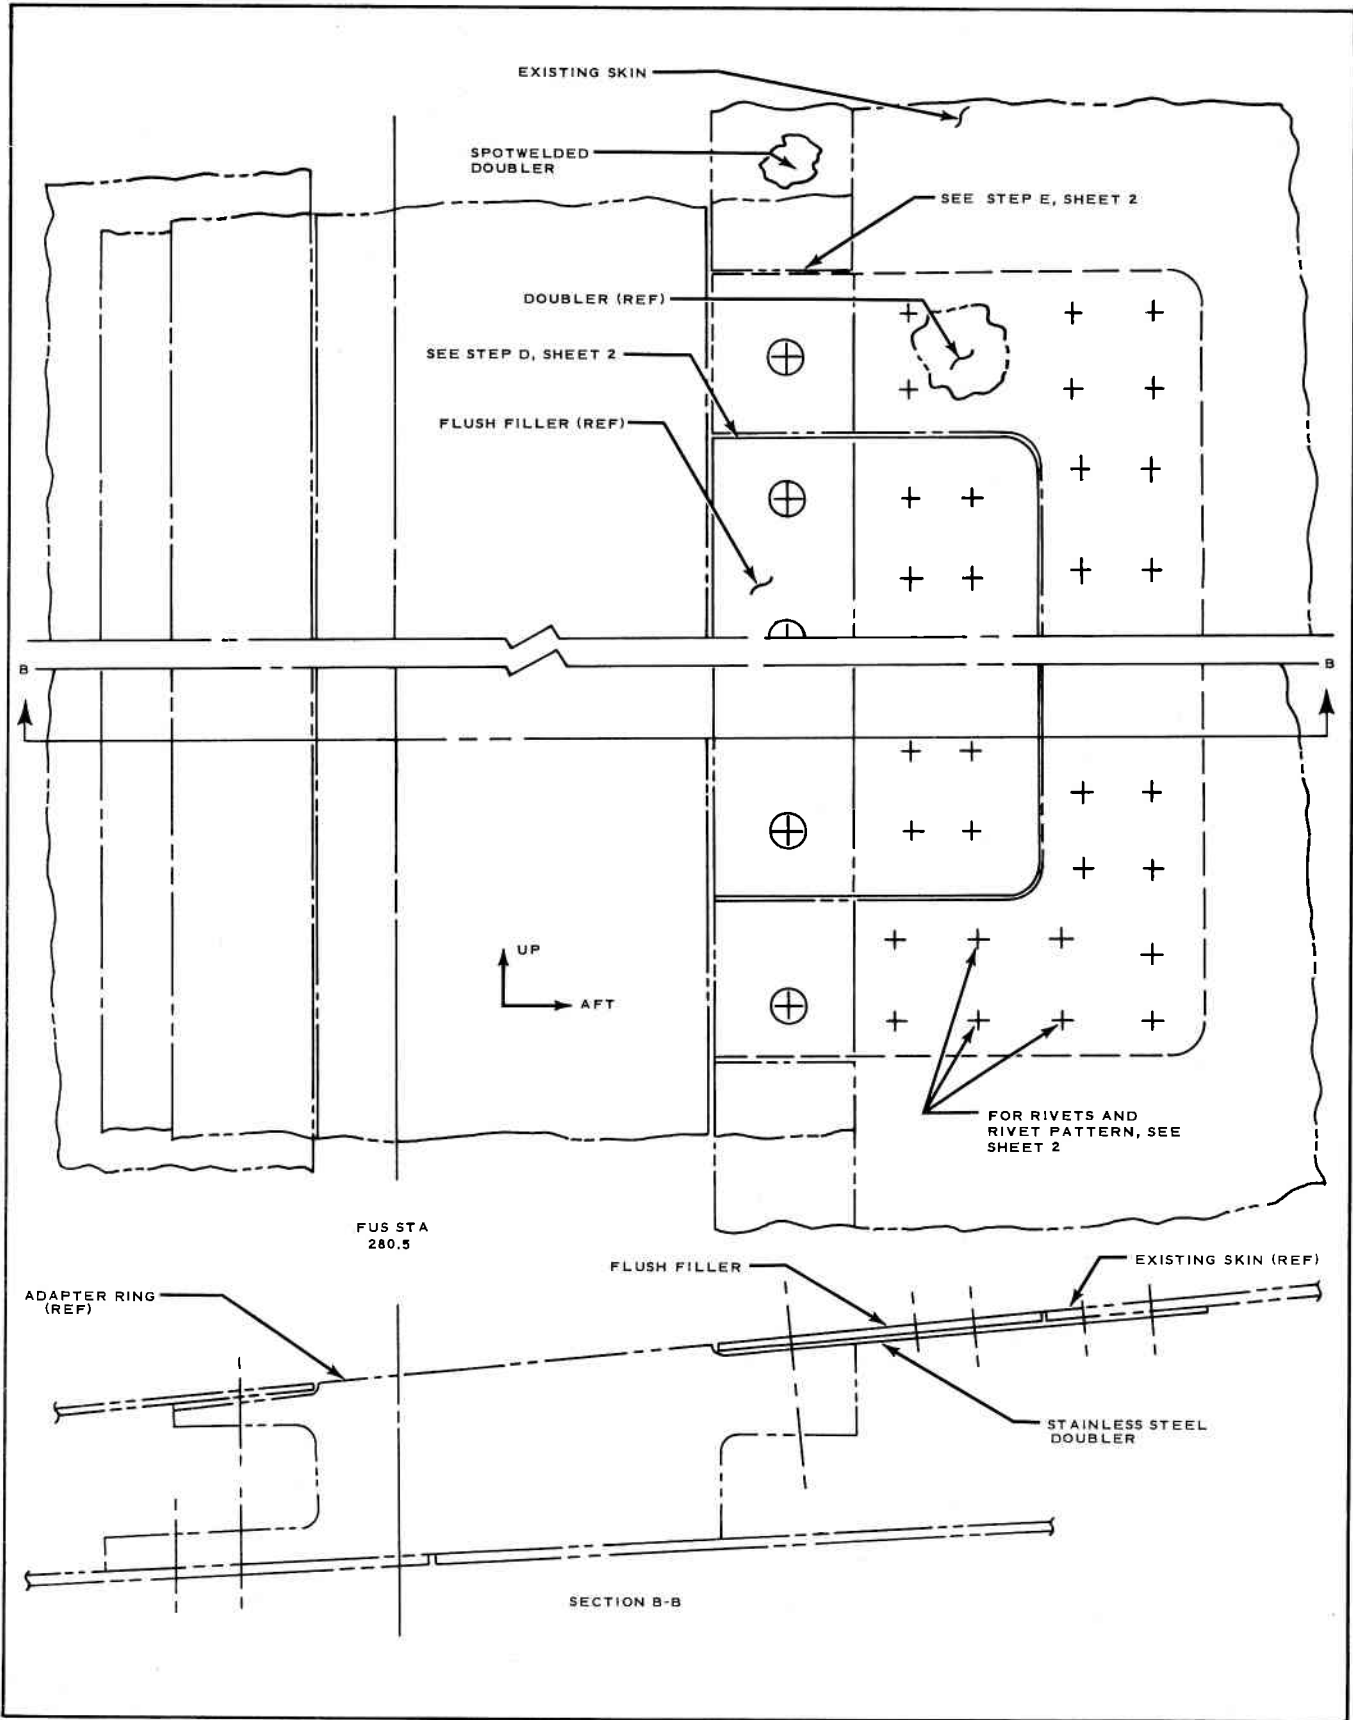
D. Air Intake Duct, Skin Crack – Typical Repair (Sheet 3 of 3)
